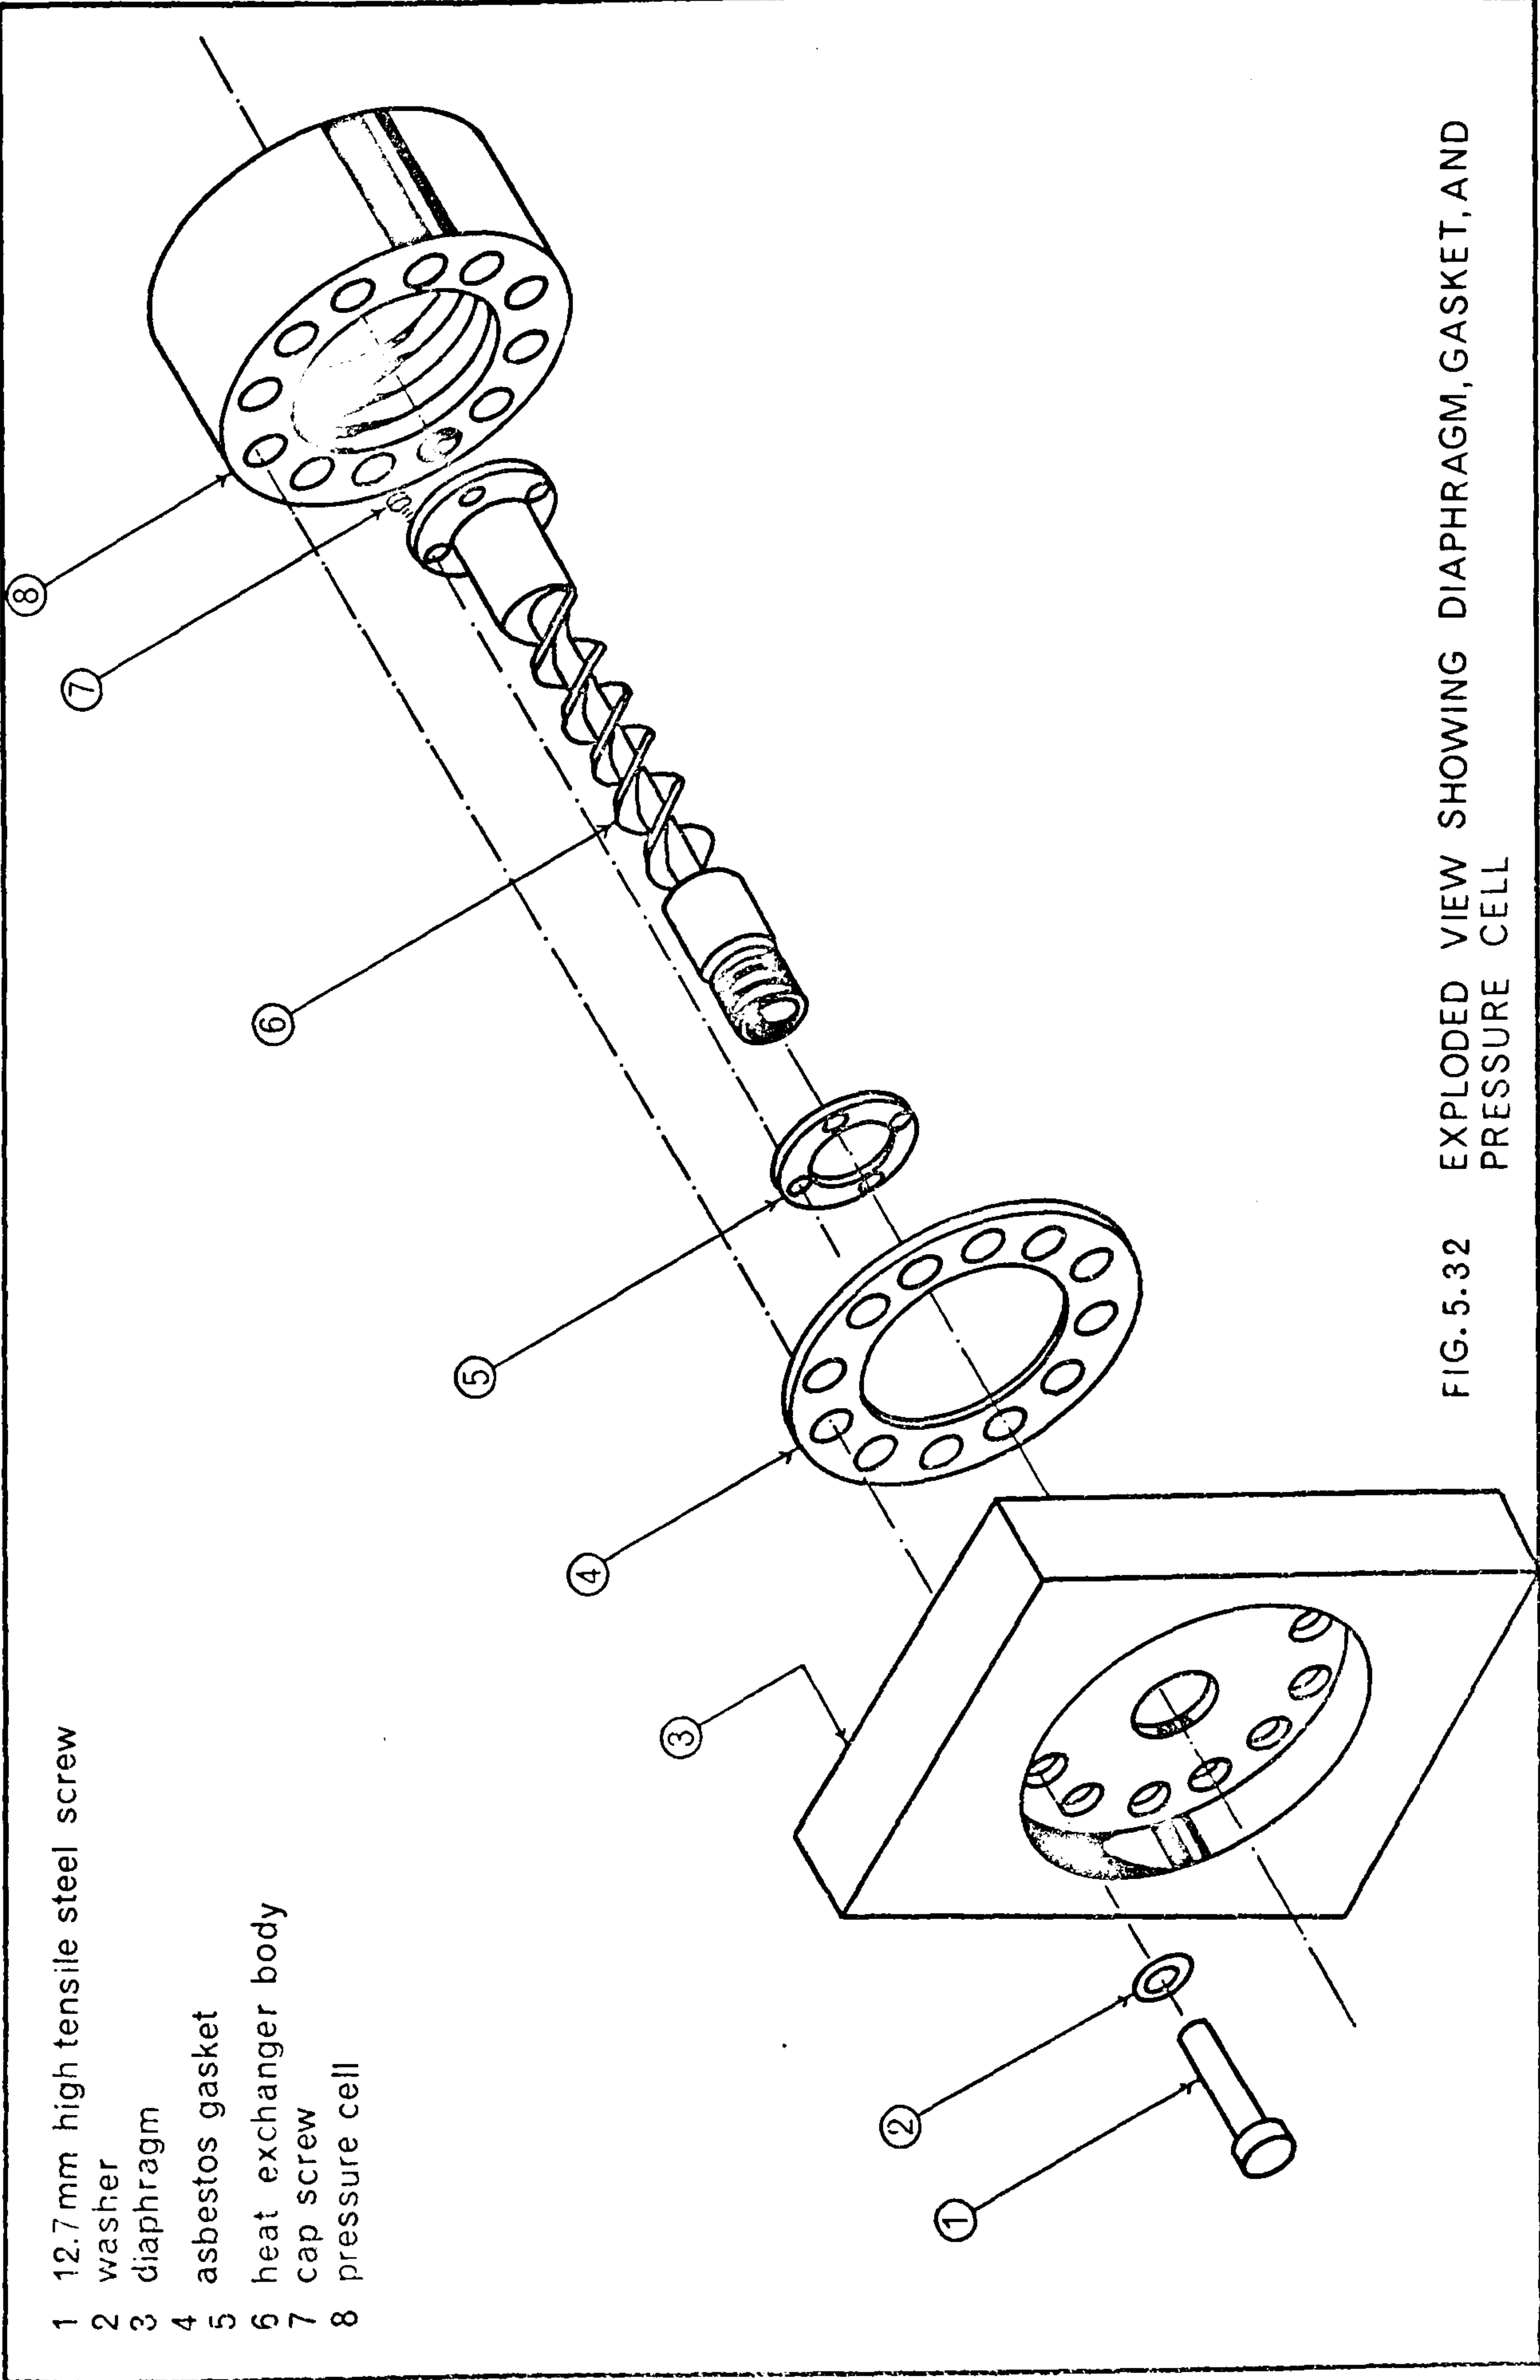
EXPLODED VIEW SHOWING DIAPHRAGM, GASKET, AND PRESSURE CELL
